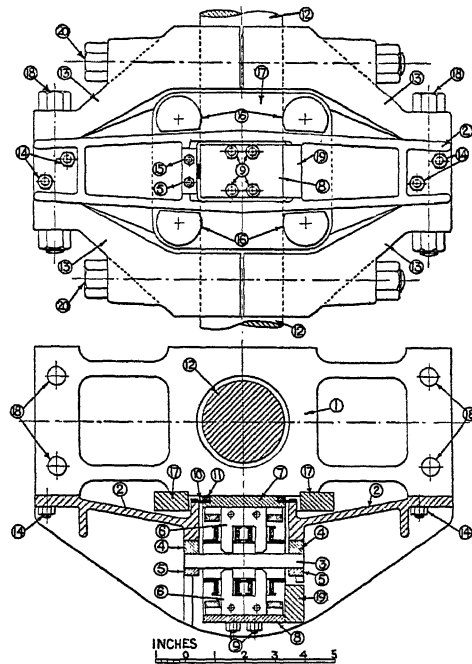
Complete load-gauge. Above: inverted plan. Below: part section with supporting brackets 13 removed.
